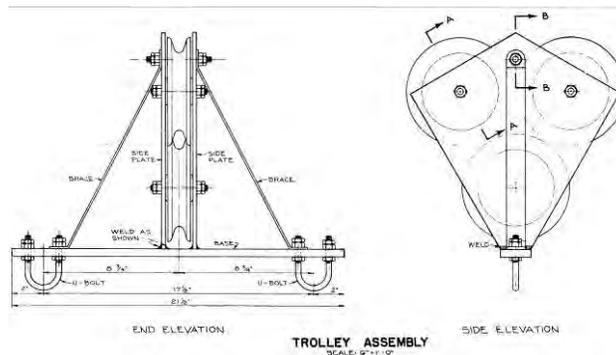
Mock-up tower for airborne training, trolley assembly, Fort Bragg, NC, 1952 (standard drawing 28-13-59 sheet 6 of 6; mock-up tower for airborne training, trolley assembly and details; 11 April 1952).
